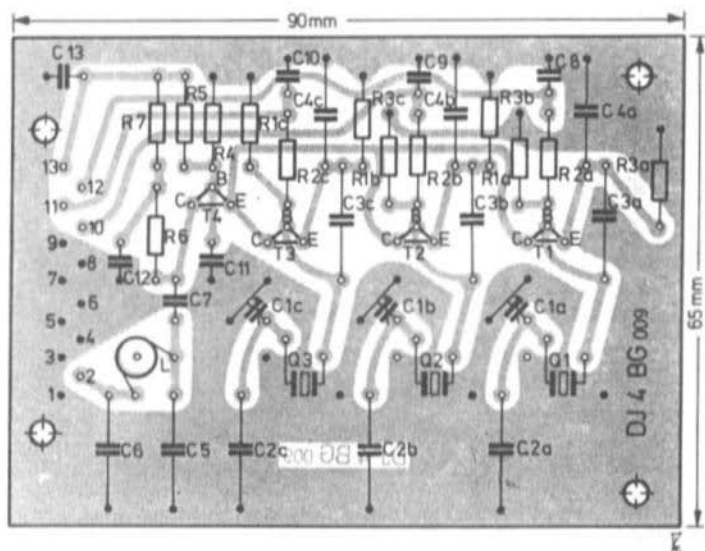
Printed circuit board DJ 4 BG 009 showing the component positions
